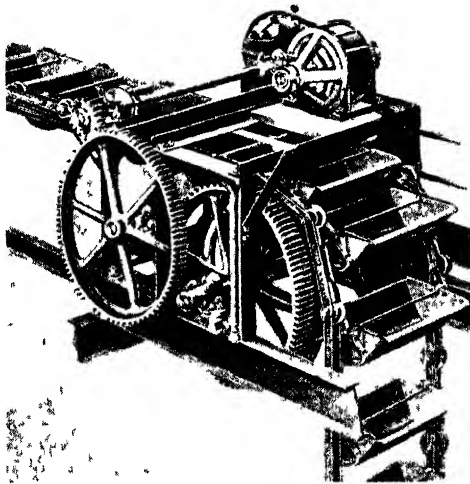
Mechanism of bucket carrier (Peck Link-Belt conveyor)
